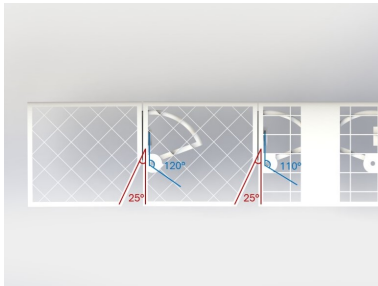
Left wing assembly with outer wing (left), inner wing (middle), and base wing (right). Chamfer angles (red) and spring groove and hole angles (blue) are shown.
